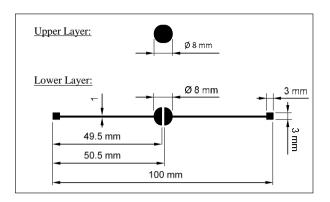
Design of the switching cycle test pattern (upper and lower layer)
